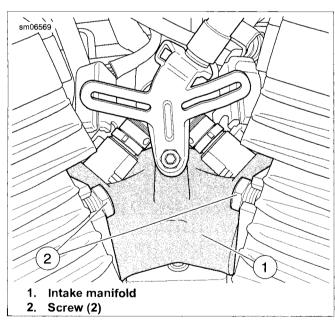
Intake Manifold Mounting Screws: Left Side
